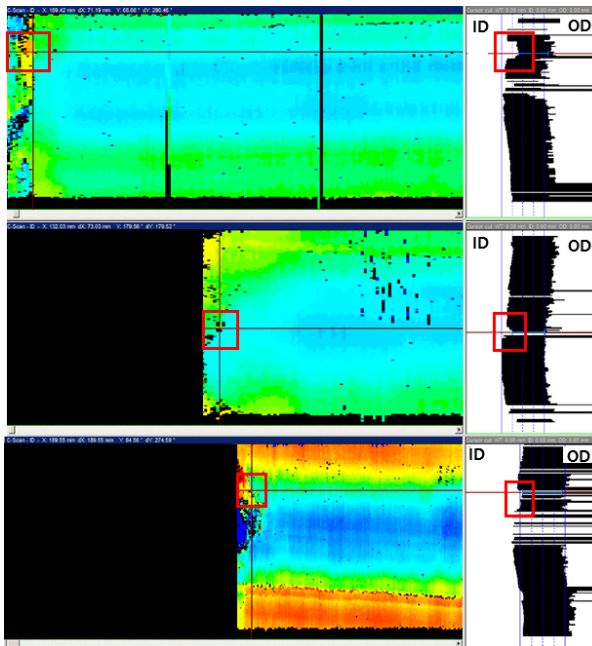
Pitting corrosion points on IRIS inspection.
